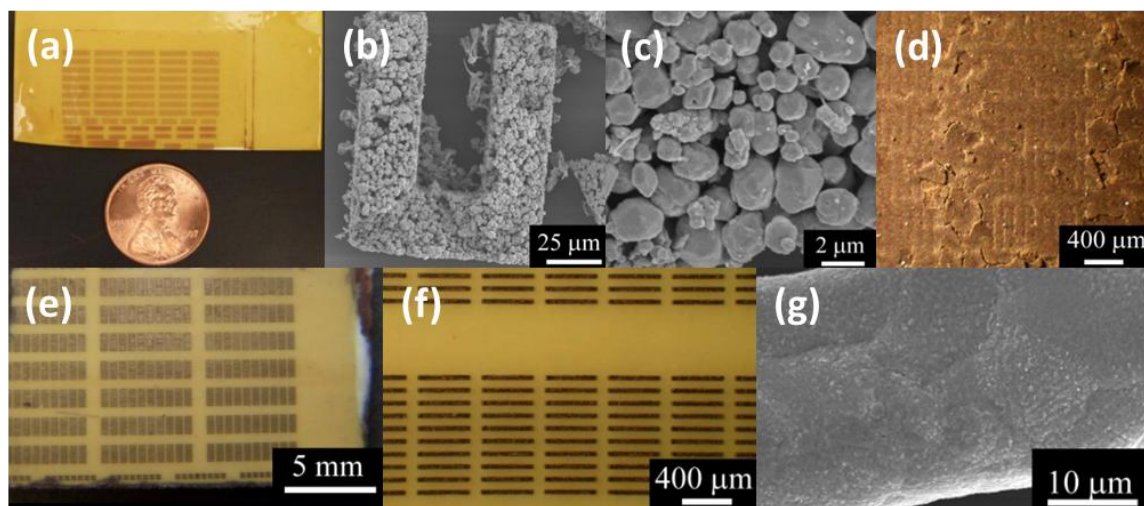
Images (a-c) shows copper mesoscale parts that have been formed using a low nanoparticle concentration. Images (d-g) show Cu-parts formed using centrifugal casting with the LM-RIF process. Image (a) illustrates the size of the full mold cavities relative to a penny. Images (b) and (c) illustrate the porosity and large grain sizes due to the low solid concentration in the copper nanoparticle suspension. Image (d) shows mold cavities that are over filled with copper nanoparticles using centripetal casting followed by cold isostatic pressing (CIP). Images (e) and (f) illustrate the neatly arrayed parts once the layer of copper is removed. Image (g) illustrates the dense microstructure after sintering.
